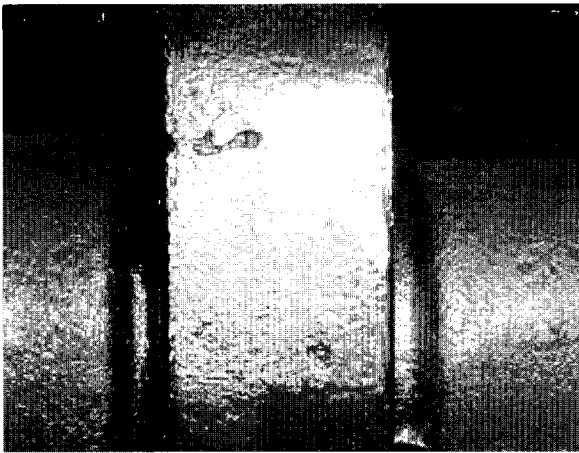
Slag or sand defects on the surface of a chilled grey iron casting
